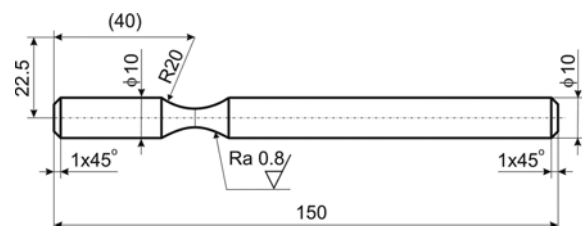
Shape and dimension fatigue test specimen (dimension in mm)
